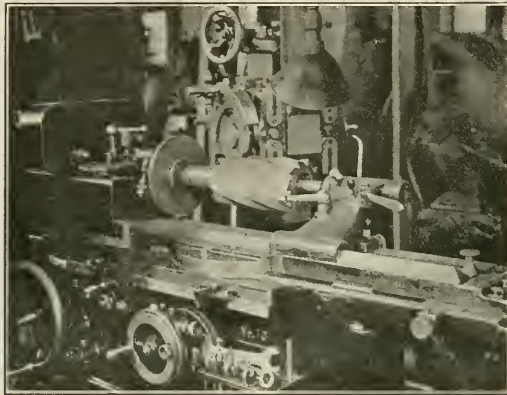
The Universal Cutter Grinder—An Essential Shop Tool
